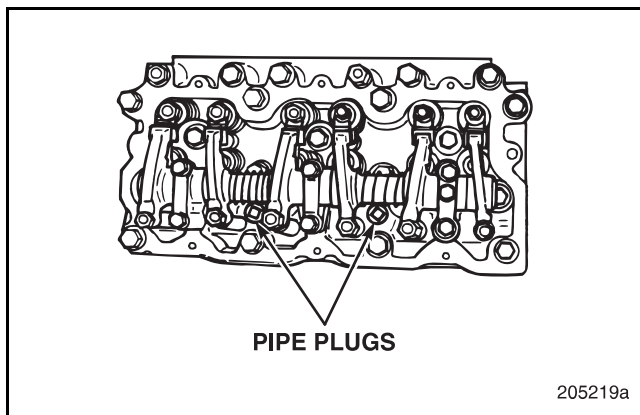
Cylinder Head Pipe Plugs (3/4-Inch NPT)
